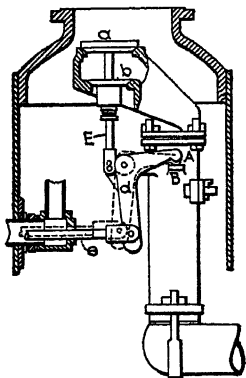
LOCOMOTIVE THROTTLE VALVE
